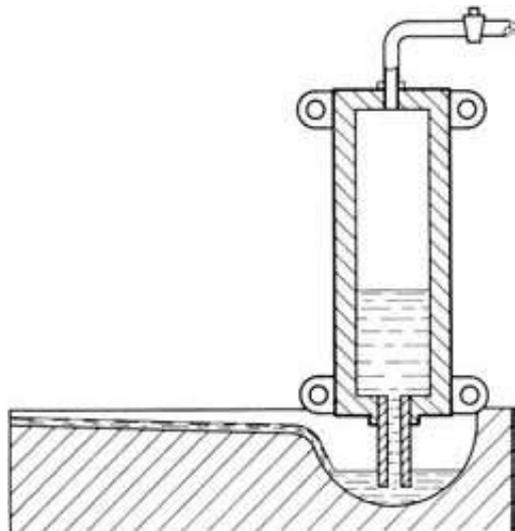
Bessmer's proposal for steel casting from 1865<sup>1472</sup>
